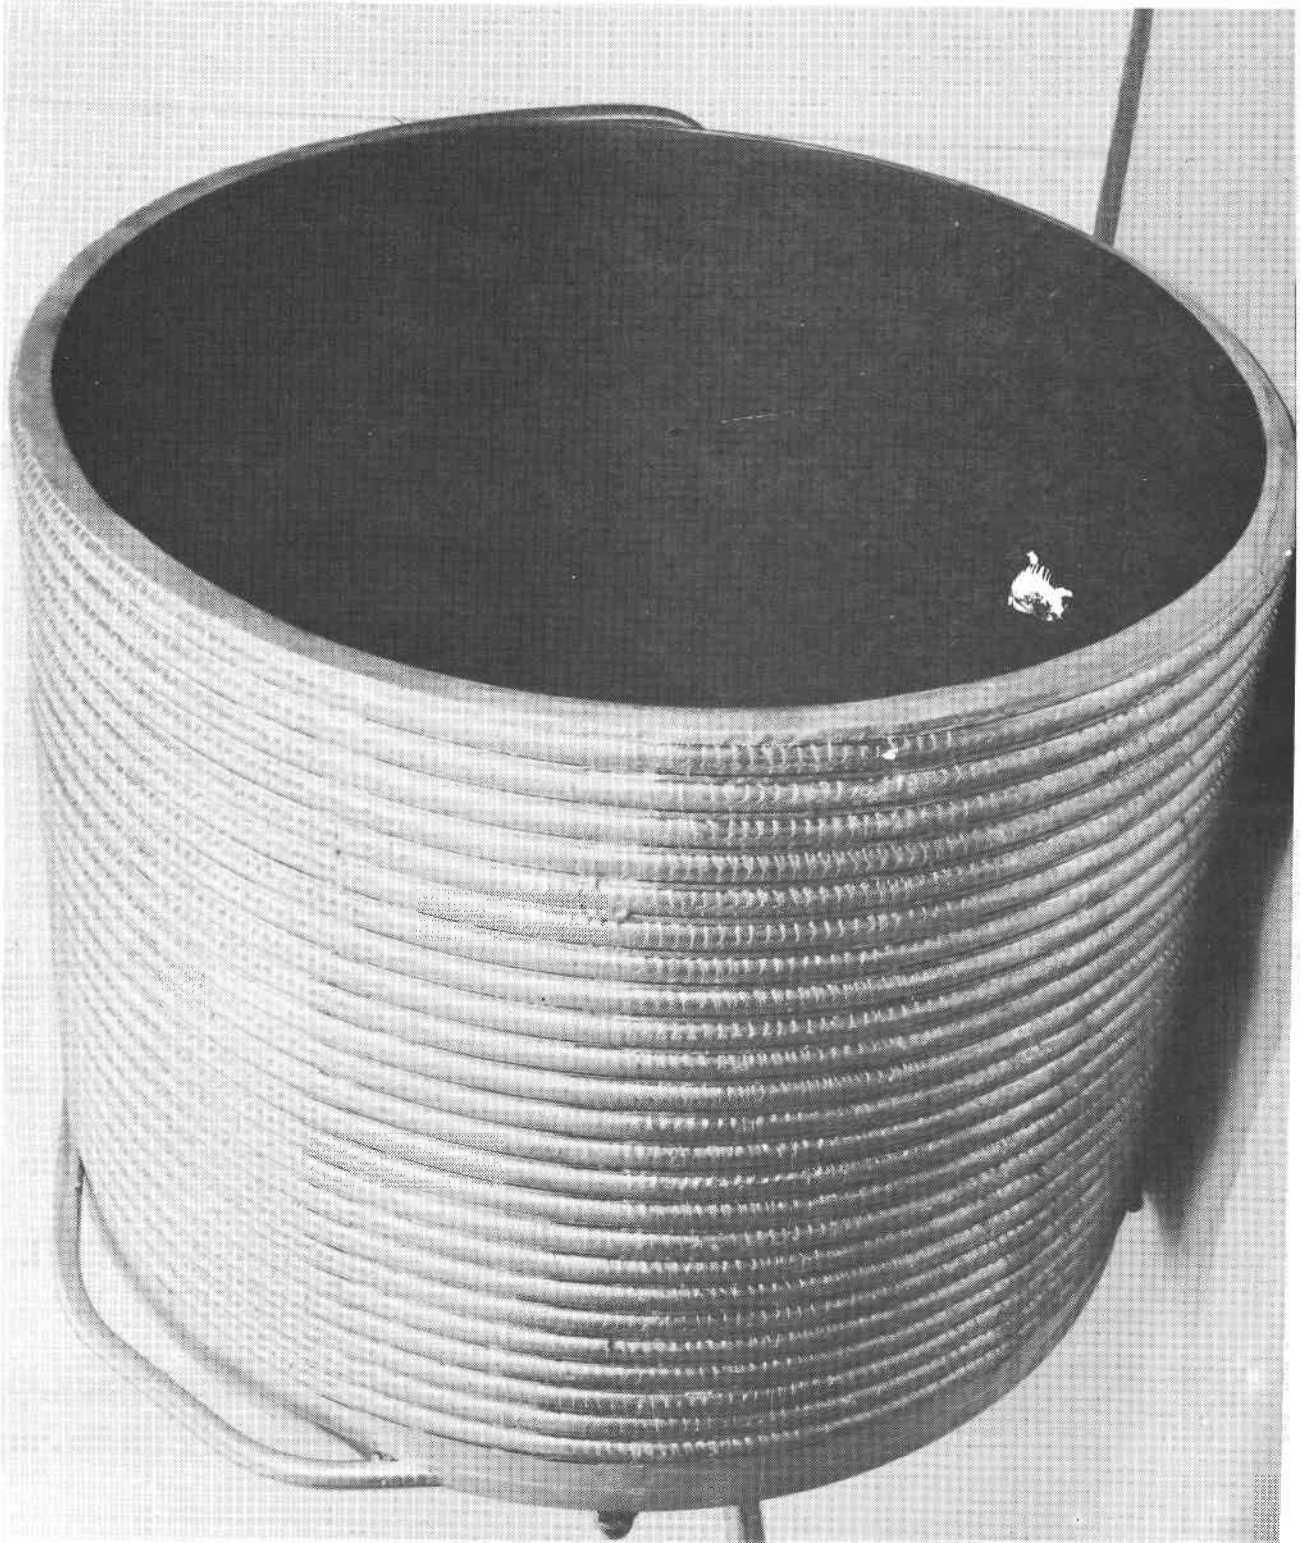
ORC RECEIVER CORE SHOWING BRAISED STAINLESS STEEL TUBING
